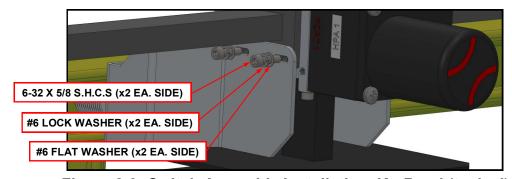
Switch Assembly Installation, Ku-Band (typical)
